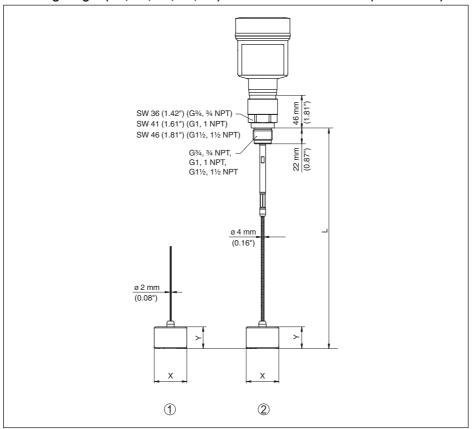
Centering weight of metal, ø 40, 45, 70, 75, 95 mm (1.57, 1.77, 2.76, 2.95, 3.74 in) for VEGAFLEX 81, 82, 86 in cable version
